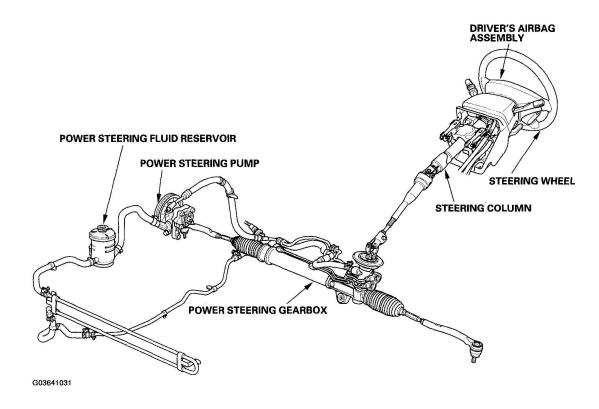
Identifying Power Steering Component Location Courtesy of AMERICAN HONDA MOTOR CO., INC.
